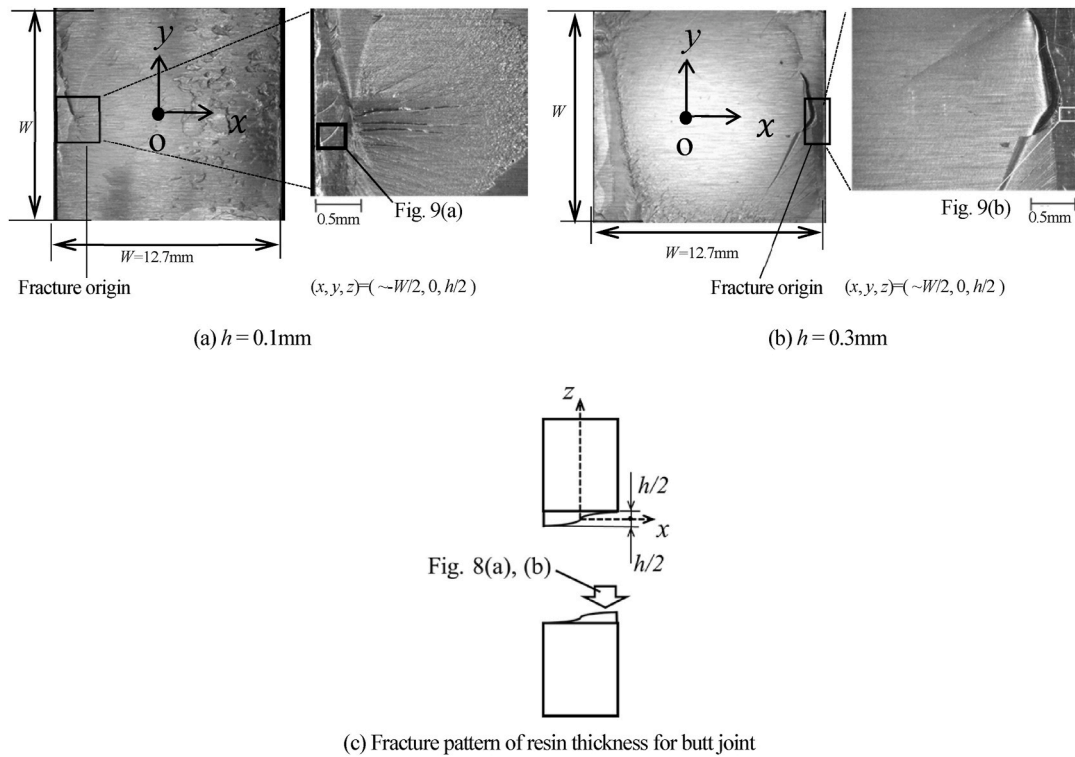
Fractured surface of the butt joint specimens focusing on the fracture origin on the surface in Fig. 8(c).
